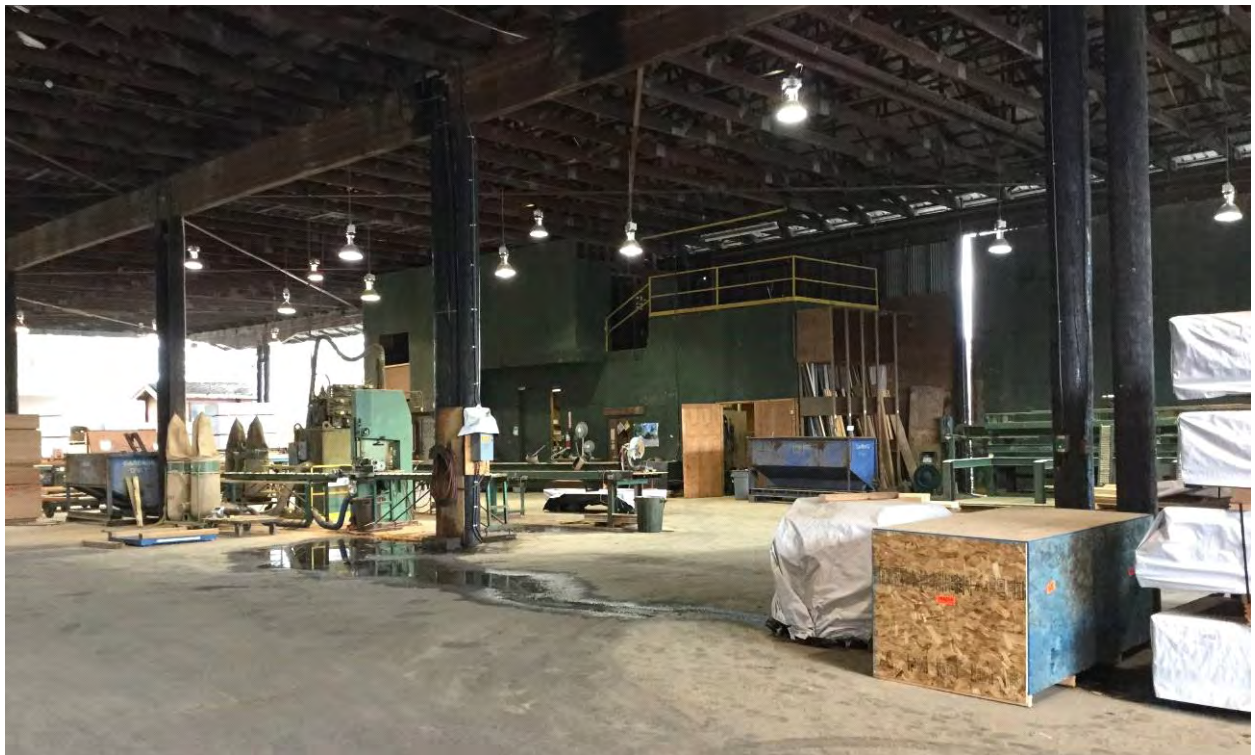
Panabode's wood processing operation in the distribution warehouse, facing southeast.
